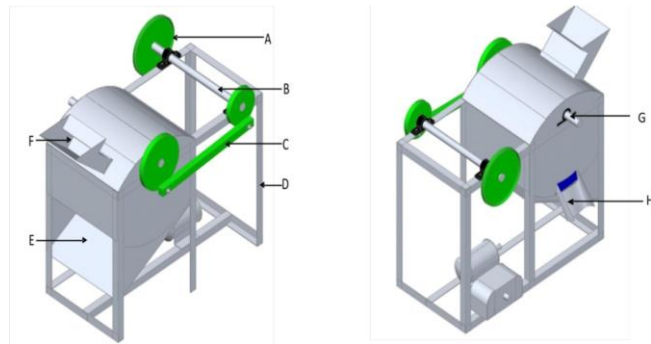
Isometric view of the developed ginger rhizomes peeling machine Legend: A-Puley, B-Puley shaft, C-Connecting rod, D-Frame, E-Discharge shute, F-Hopper, G-Shoe pad shaft, H- Discharge gate
